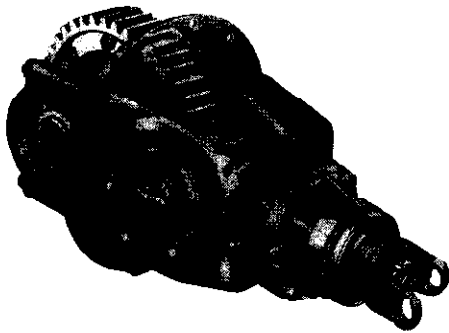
Illustration No. 46—Double Reduction, Single Speed Axle Carrier Assembly—Optional Equipment—All Models
